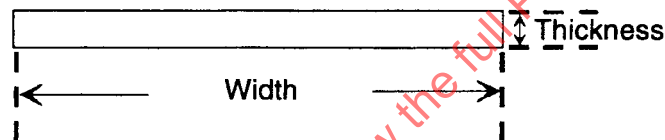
Continuous Non-Ribbed Moldable Sealing Tape, Sizes and Tolerances
